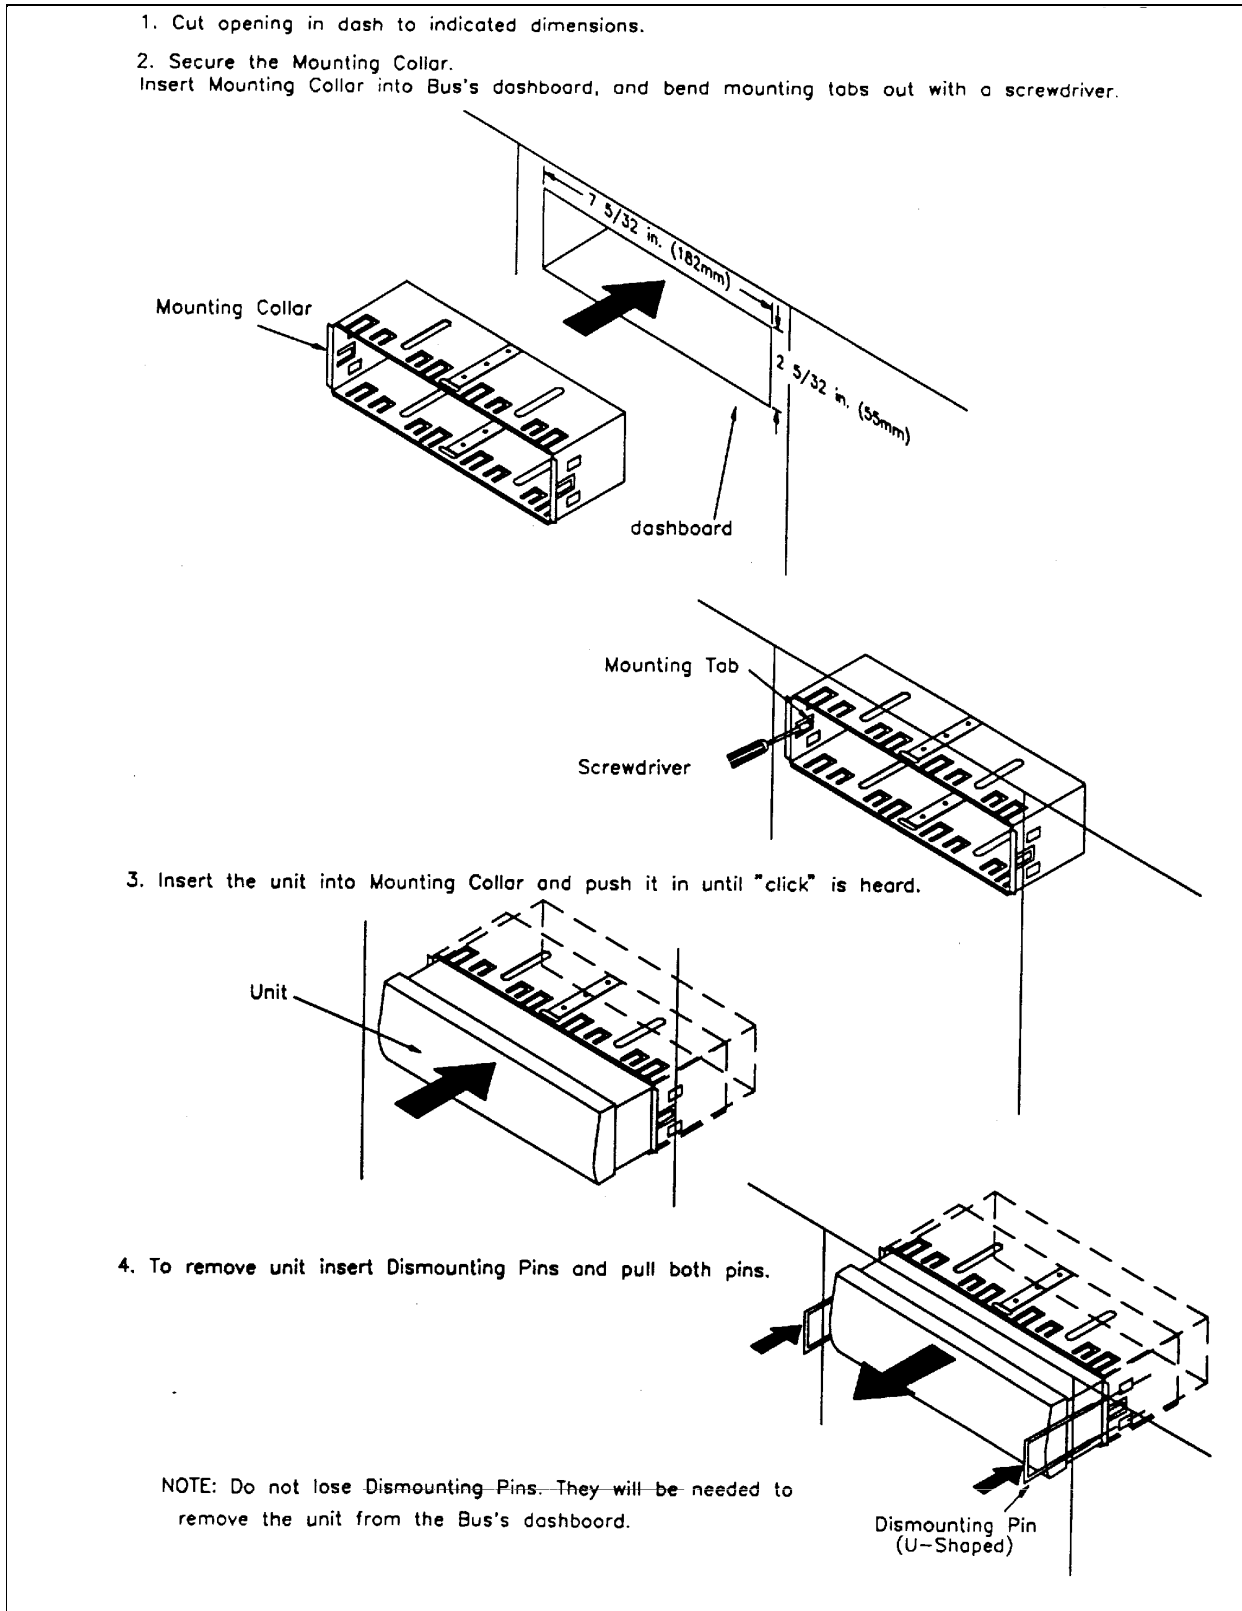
CONTROL HEAD AND RADIO MOUNTING INSTRUCTIONS
